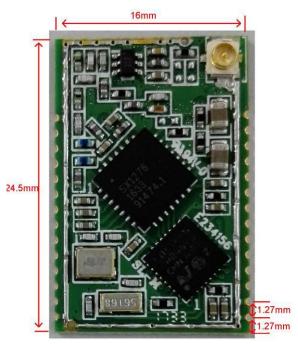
Mechanical Drawing and Dimensions The module size is 16.0\*24.5\*3.0mm
